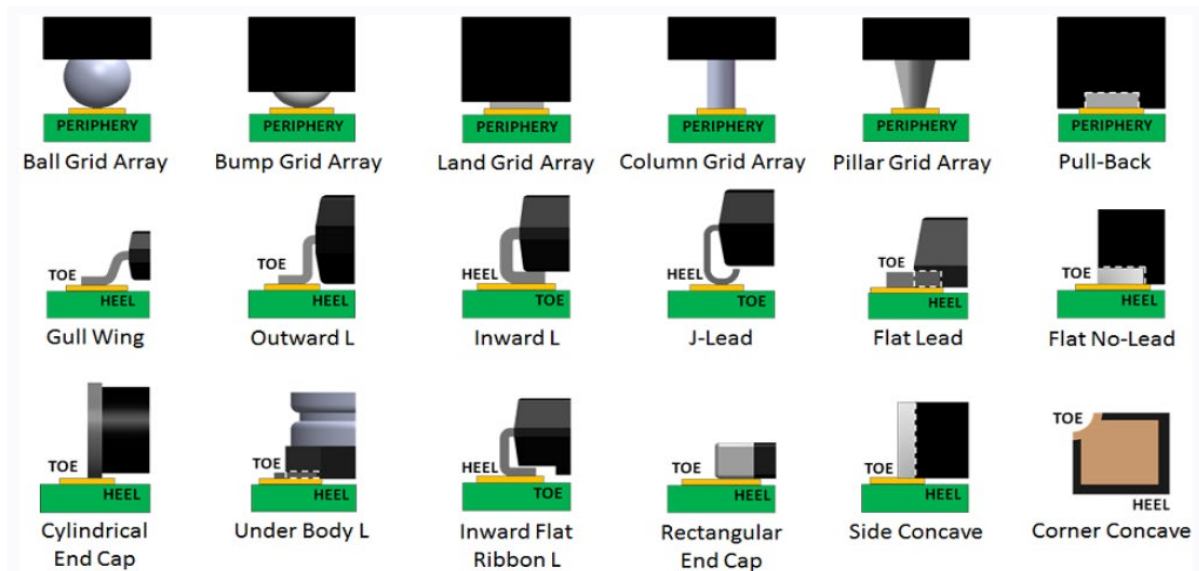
Different types of soldering used in PCB development (Jones, 2004)
